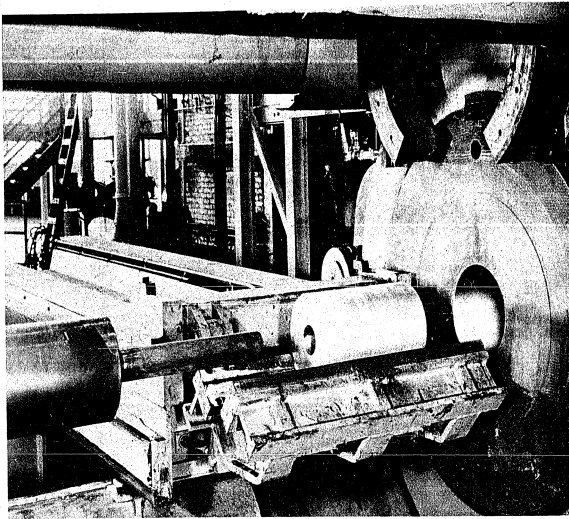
(e) - CLOSE-UP VIEW OF THE BILLET IN POSITION FOR EXTRUSION
